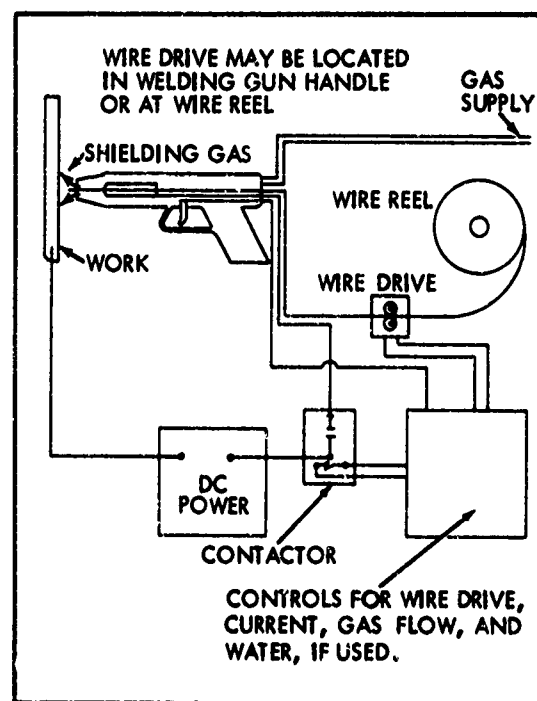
Schematic Diagram of Equipment for Inert Gas Metal Arc Consumable Electrode Welding
